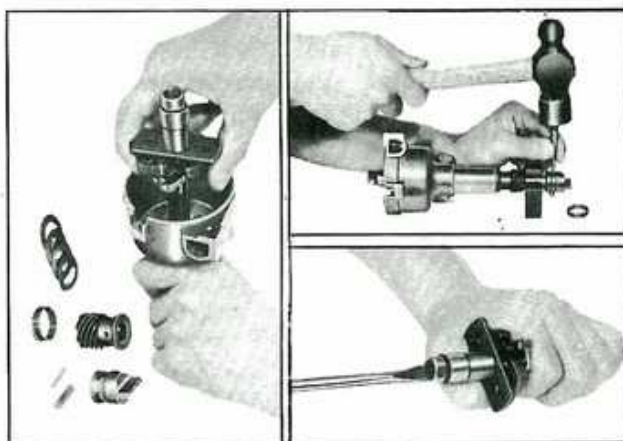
Disassembly of Coupling Shaft and Cam
